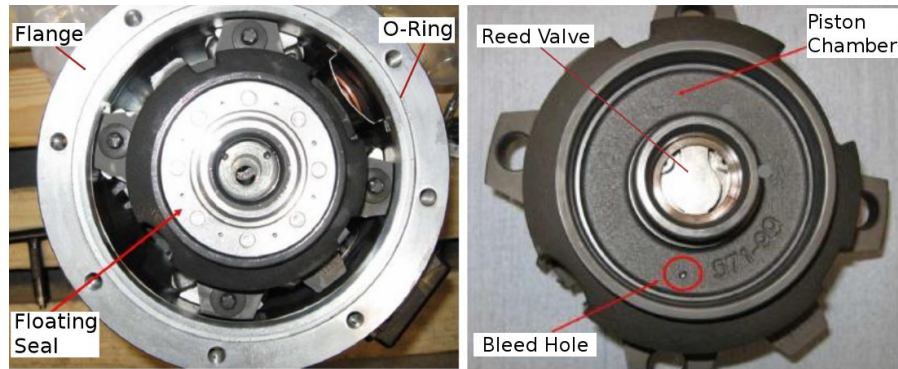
Stationary scroll. Left: inside the casing with the floating seal. Right: without floating seal
